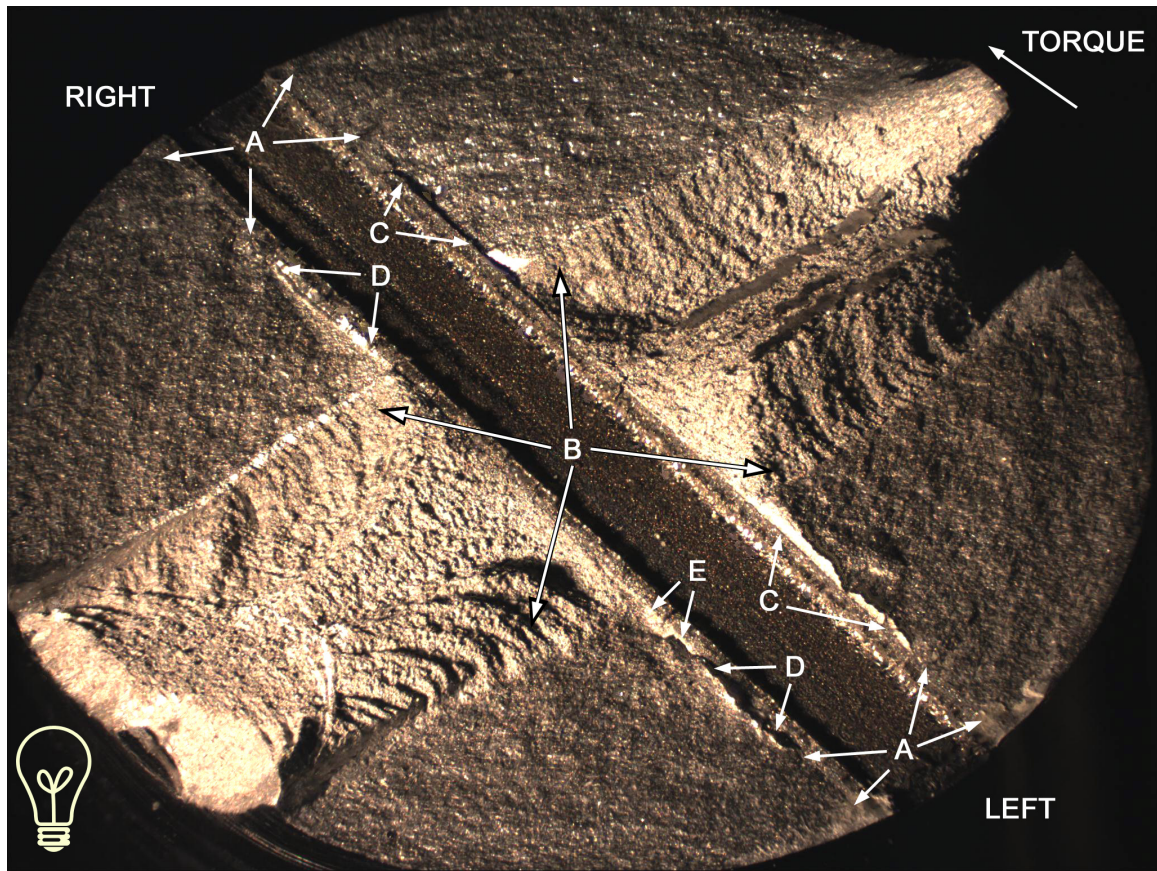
Annotated oblique view of bottom fracture surface of ITCR #2, showing (A) shallow positively-deflected crack growth, (B) final fracture, (C) and (E) steep crack-opening deflections, (D) steep crack-closing pseudo-deflections. (Rotation under torque is counter-clockwise.)
